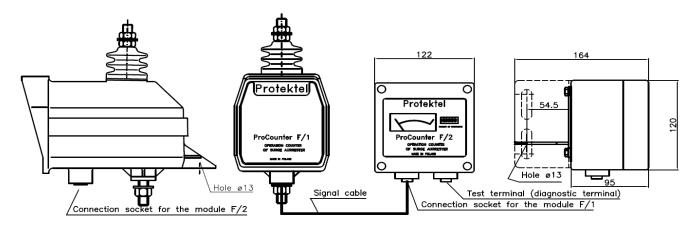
Dimensional drawing of the ProCounter F surge counter
